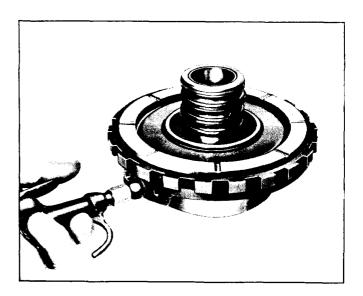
E-144 Air Checking Intermediate Clutch Piston
